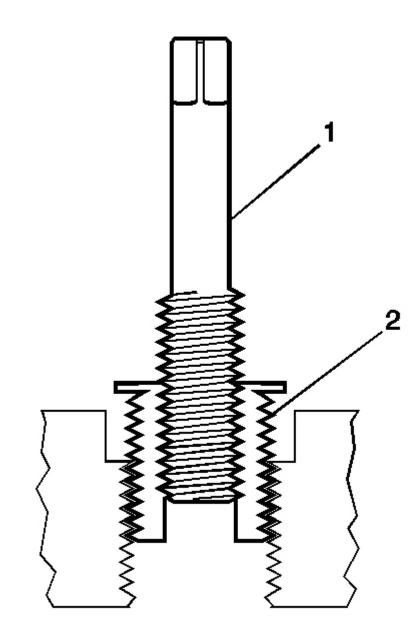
Installing Insert - Recessed Thread Courtesy of GENERAL MOTORS CORP.
